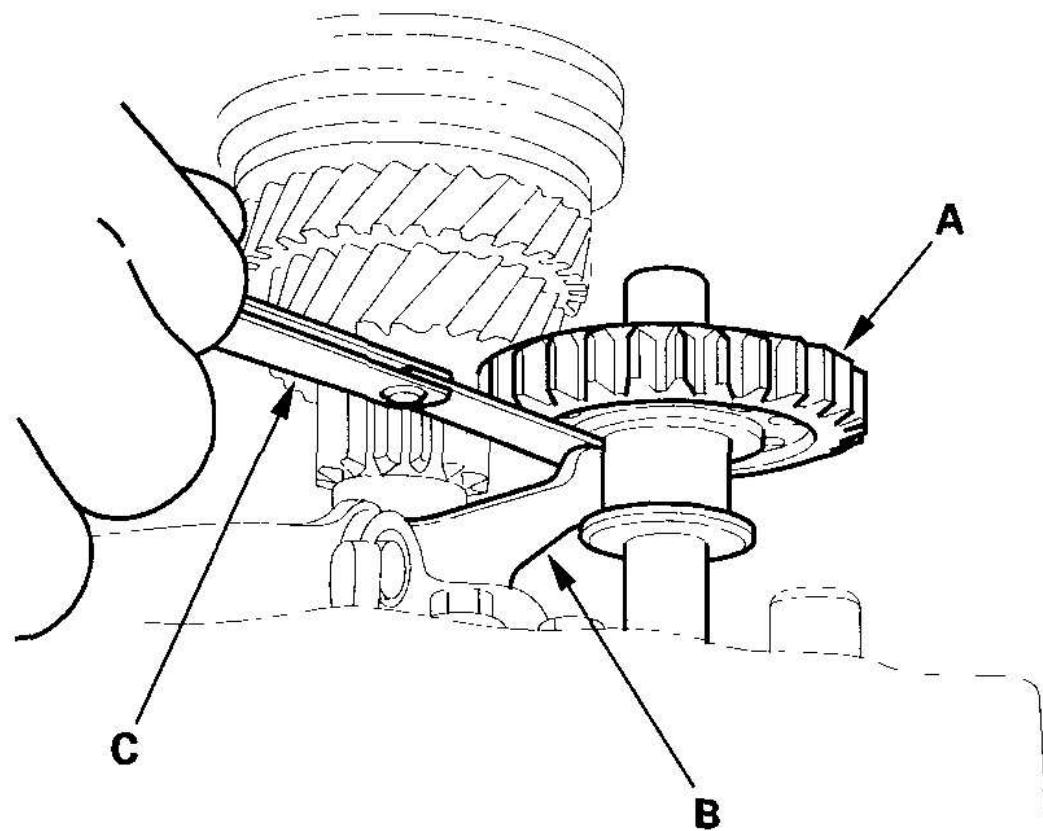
Removing Oil Gutter Plate, Oil Guide Plate, And 72 MM Shim
